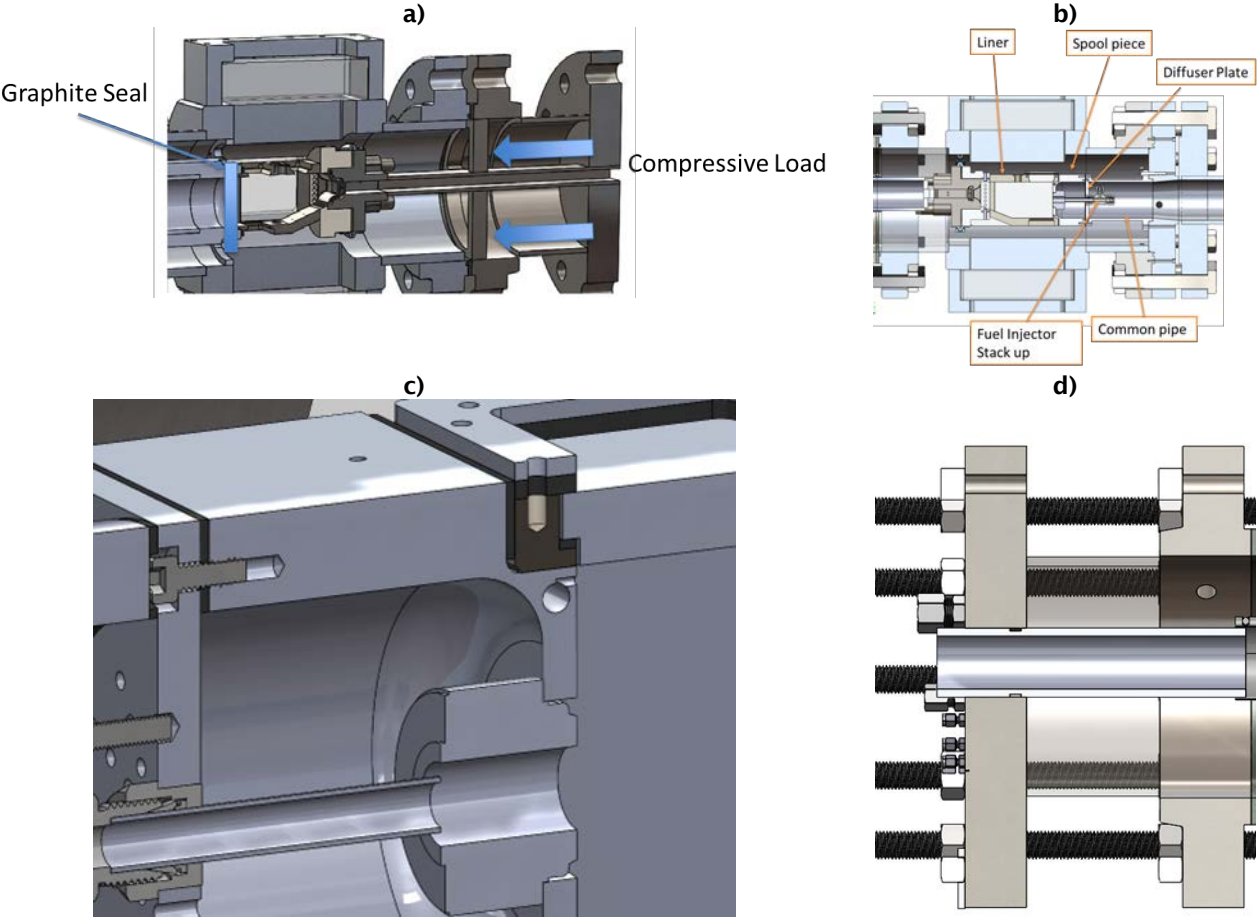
Combustor liner sealing methods. a) The original compressive sealing method, b) section view of the re-designed sealing assembly (flow is right to left), c) bolted spool/dump plane/liner assembly for improved sealing, and d) sliding O-ring exhaust pipe.
